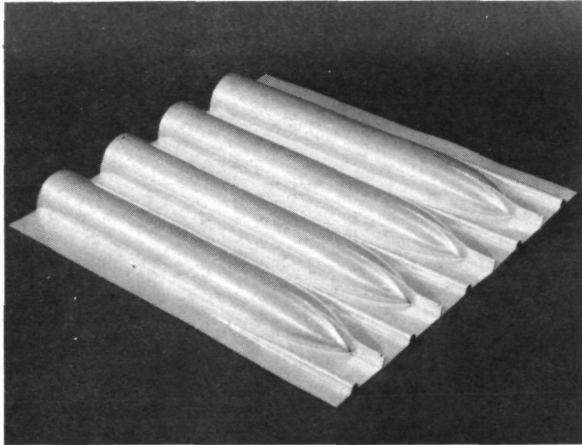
FINAL CIRCULAR TUBE END CLOSURE
